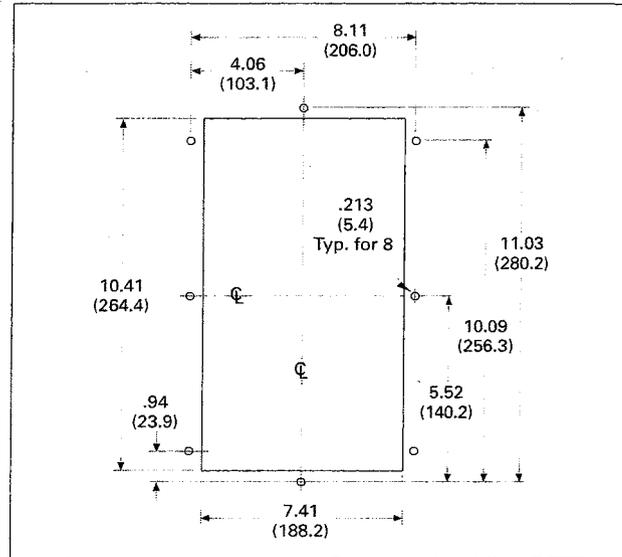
Drilling Pattern for Flange Mounting — Dimensions in Inches (mm)
